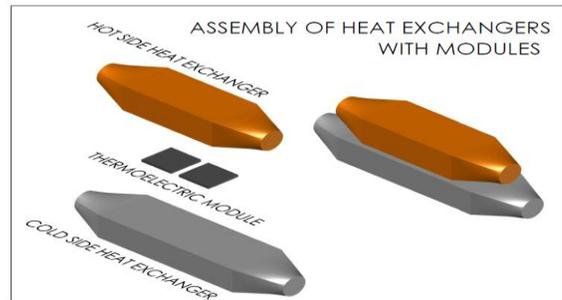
3-D Drawing of Assembly of Heat Exchangers with Modules
